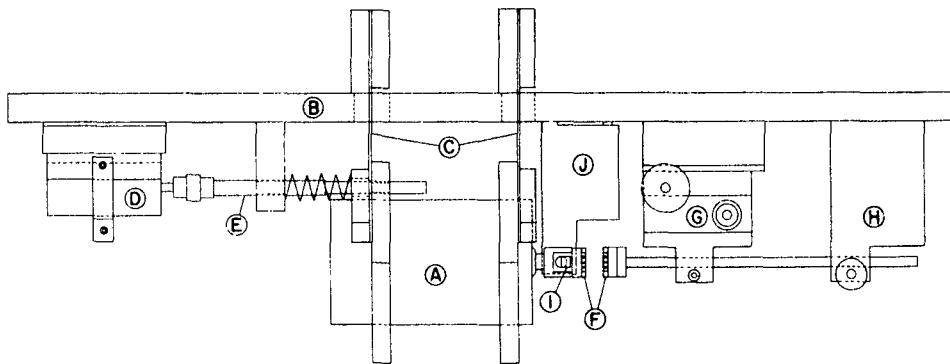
Side view of the Fiber Load Elongation Recorder, Model II. Scale: 1 in = 5 in. A - electronic weighing cell, B - mounting plate, C - flexure springs, D - dc servo motor, E - differential screw, F - clamps, G - microscope focusing mechanism, H - clamp, I - transducer, and J - pillar.
